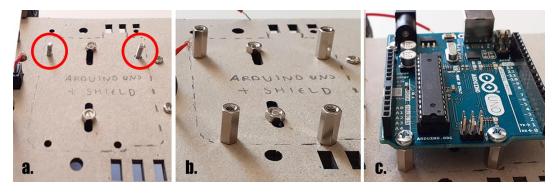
Placing Arduino board: a. Placing the countersunk M3 screws for binding; b. mounting the spacers; c. mounting Arduino board by using 3 M3 screws
